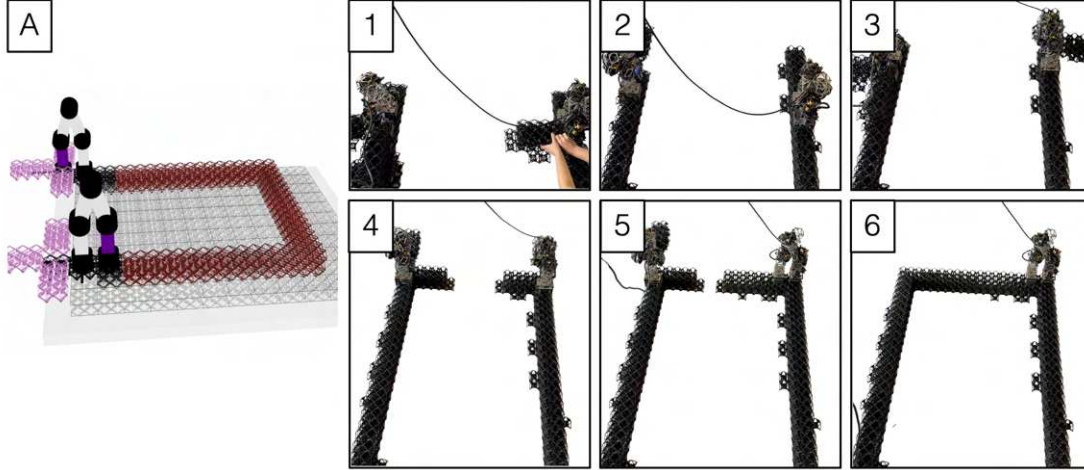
Overview of the robotic assembly of a doorframe, showing the digital twin control space and key frames of the assembly sequence.
